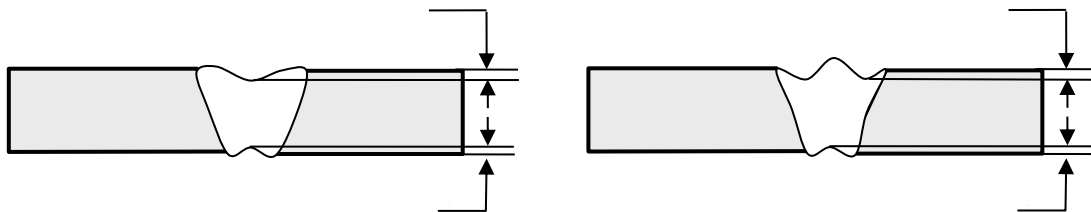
Underfilled weld joint on a TIG operation (left) respectively on a laser operation (right)
